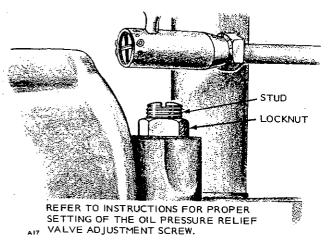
OIL PRESSURE RELIEF VALVE ADJUSTMENT
